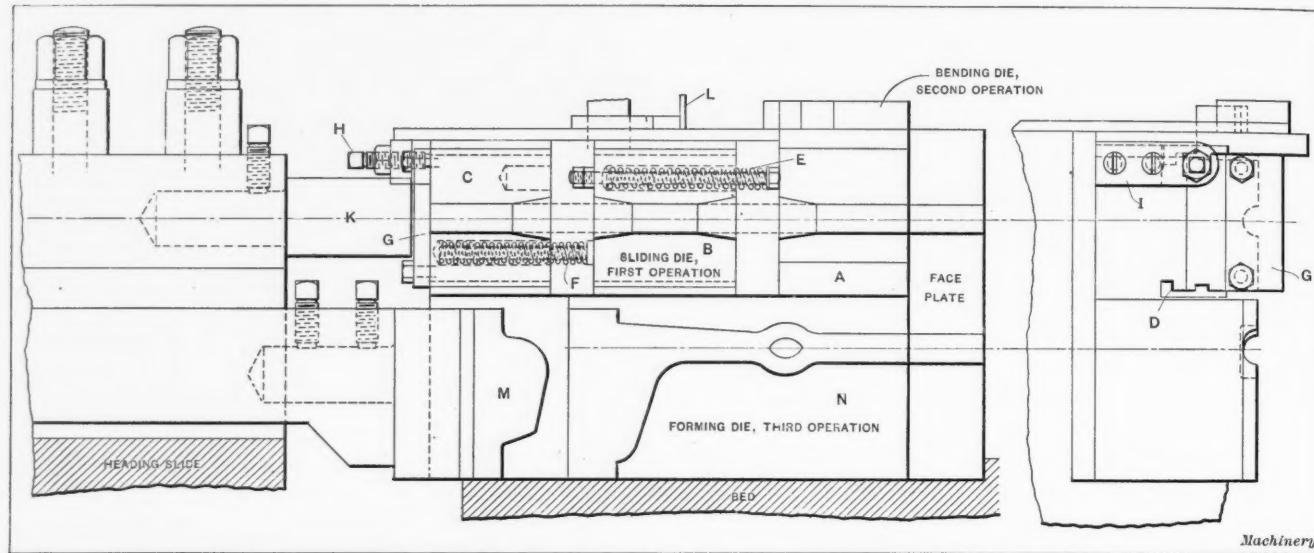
Construction of Dies and Tools used in the "National" Forging Machine for making Ford Front Axle
